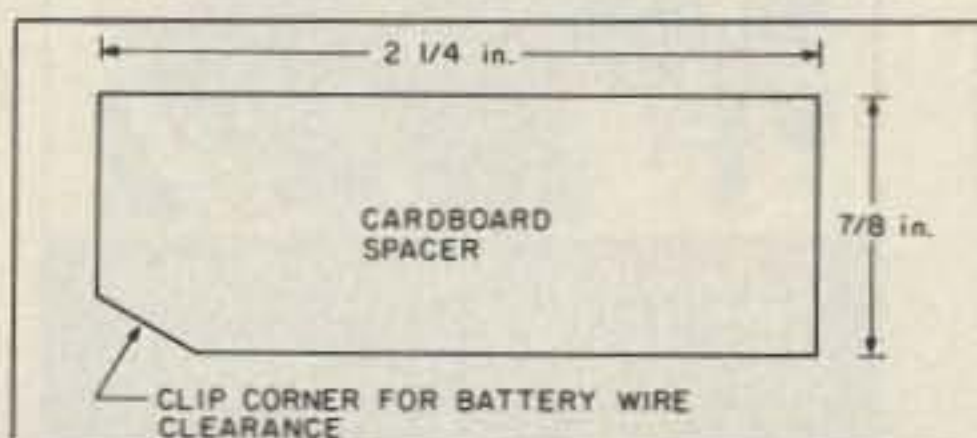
Cardboard spacer. Clip corner for battery wire clearance.
